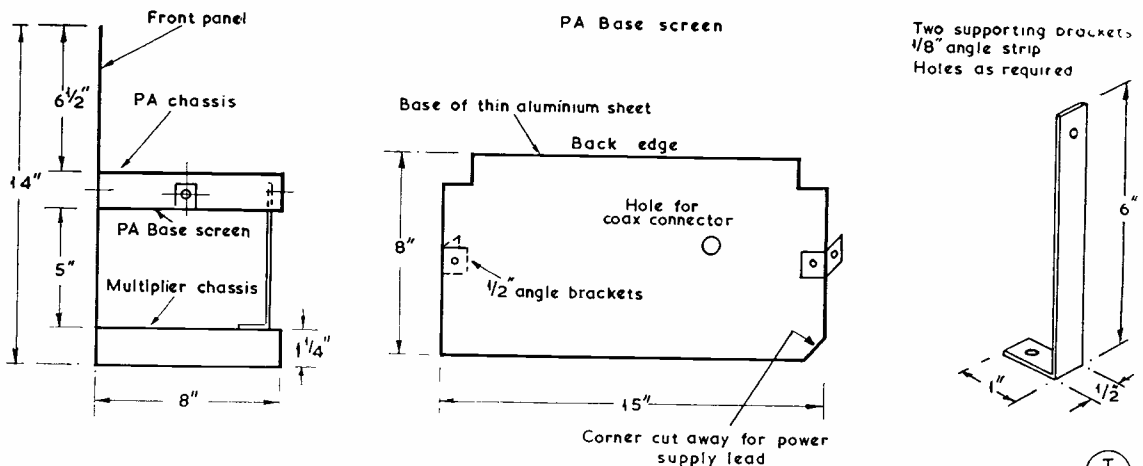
Some of the mechanical details and dimensions for panel, chassis and brackets when building the G2VV transmitter on to an ex-T.1154 framework.
